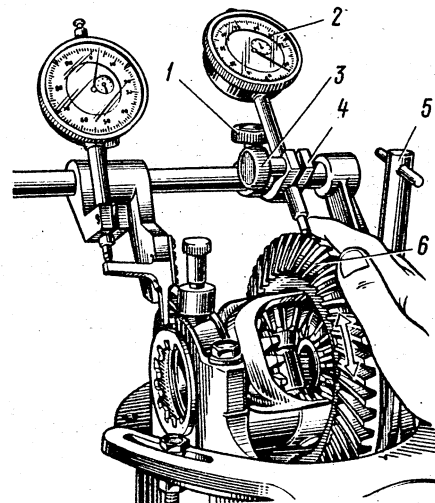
Checking the Backlash of Final Drive Gears with Gauge A.95688/R:
